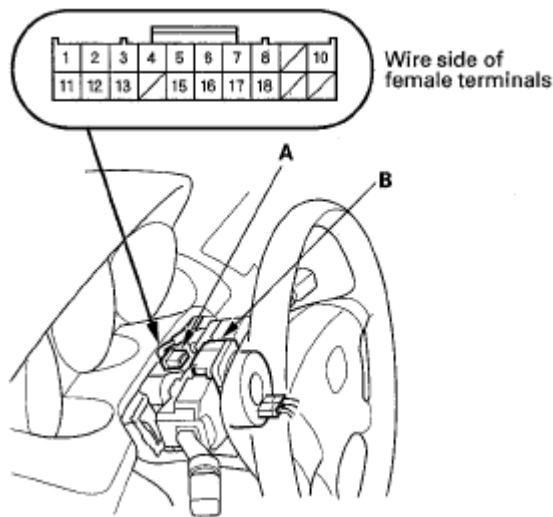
Identifying Cable Reel And Horn 20P Connector
